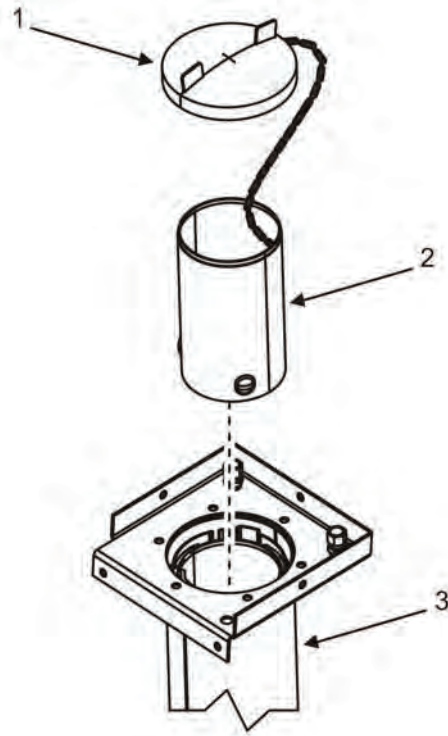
Fuel Filler Neck Ground Cable — Removal.
